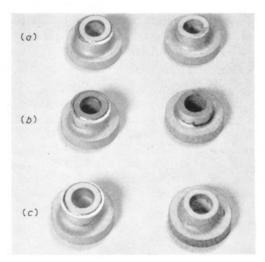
Fractured test pieces. (a) 99.8% beryllium oxide; (b) 99.5% aluminium oxide; (c) 94% aluminium oxide
